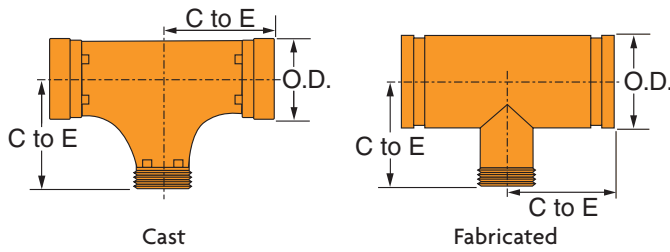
REDUCING TEE WITH THREADED BRANCH
